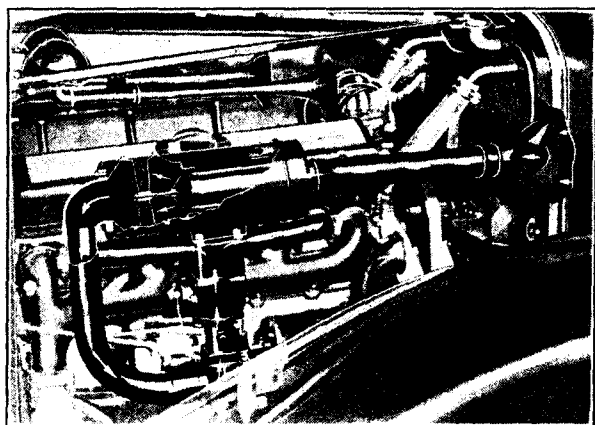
Cool fresh air for the carburetor is secured through a passage in the radiator casing
